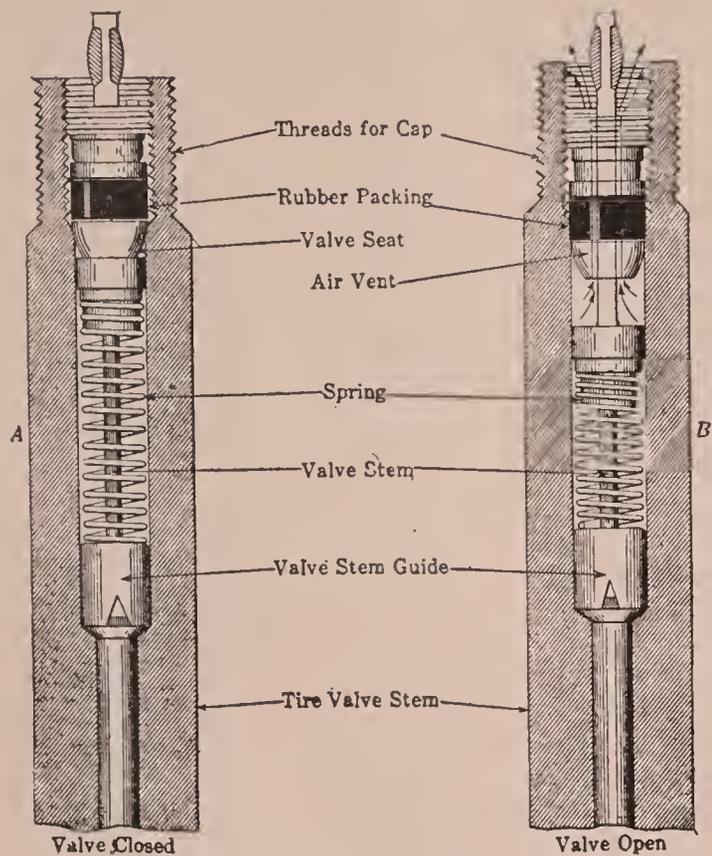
The parts of the tire valve and how they work; section showing the construction.
